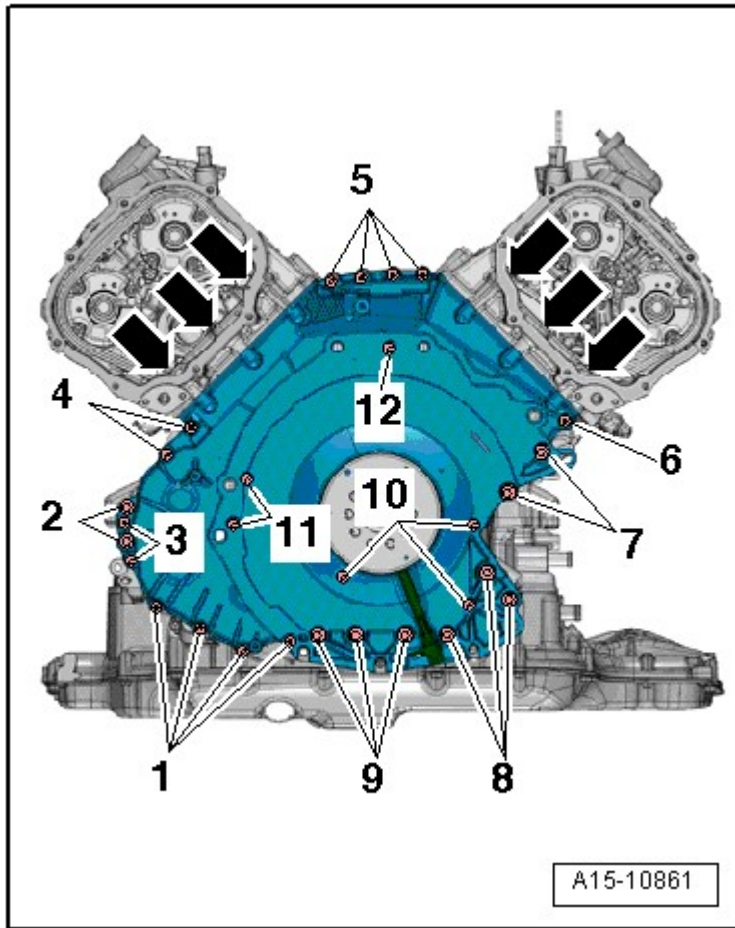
Identifying Lower Timing Chain Cover Tightening Sequence
